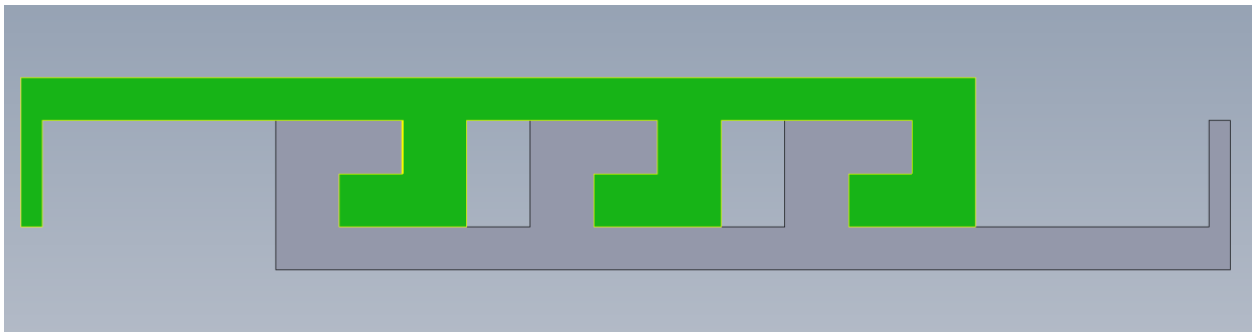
Hook design locking mechanism connected to the cable retention bars.
